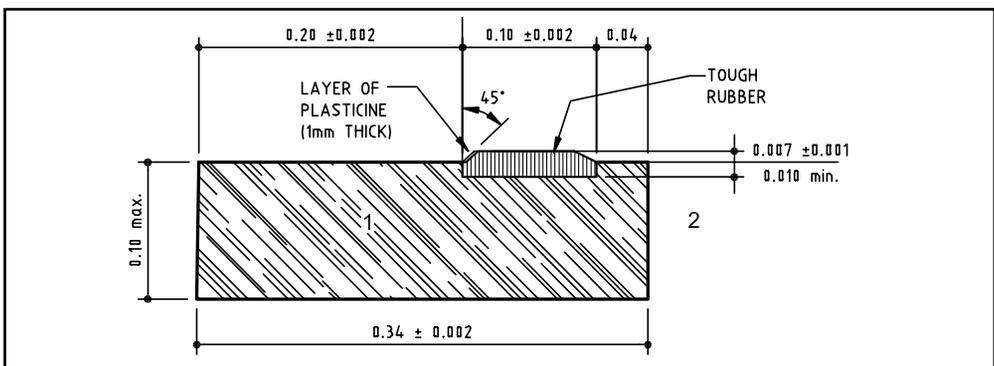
Example of a take-off board incorporating indicator board
